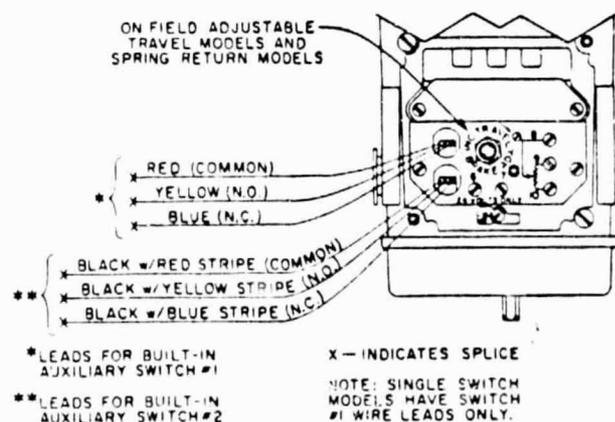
View of wiring compartment showing terminals and both travel and resistor brake adjustment.
